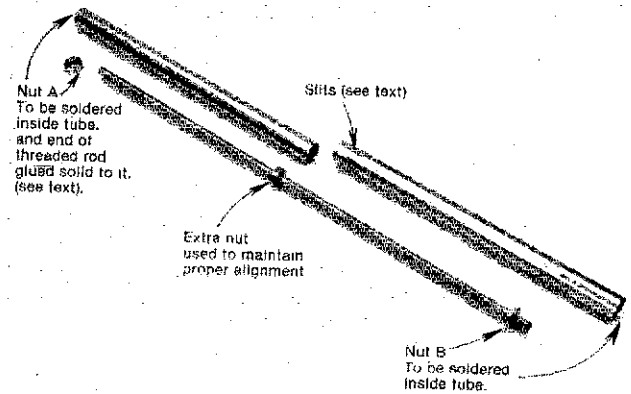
Grind off the corners of the three nuts used in this assembly. Use the threaded rod to align and hold the nuts in place for soldering. After the two end nuts are soldered, remove rod and discard center nut. Glue and assemble as described in the text.
